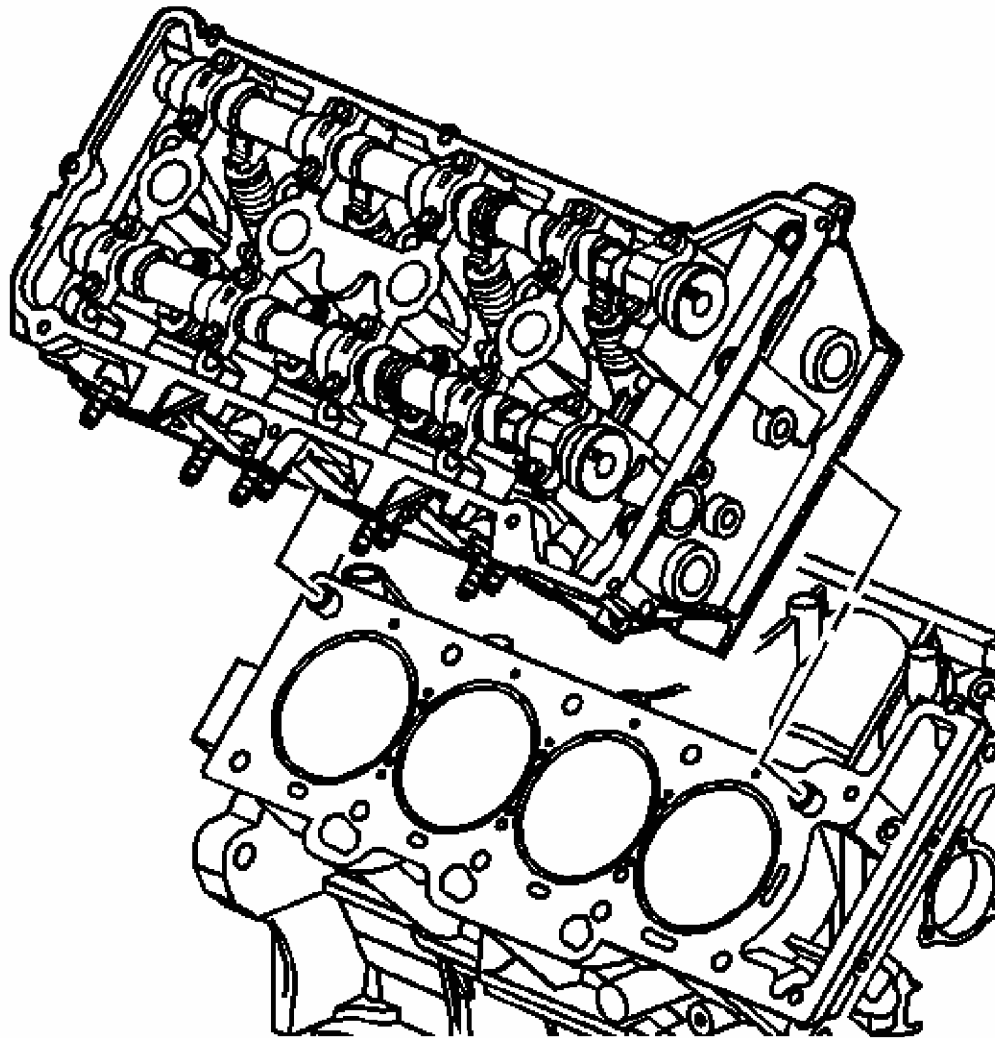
View Of Cylinder Head With Alignment Dowels - Right
